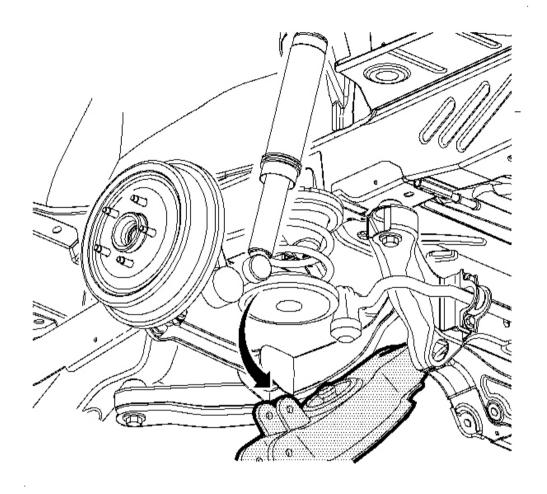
Control Arm & Coil Spring Courtesy of GENERAL MOTORS CORP.
